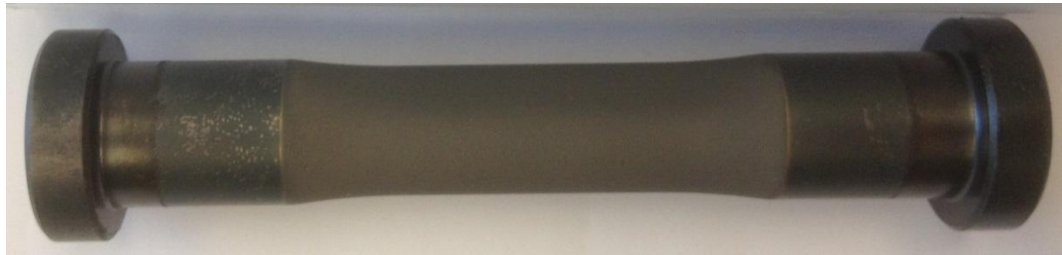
Hollow Buttonhead Test Specimen as Received from Pratt & Whitney
